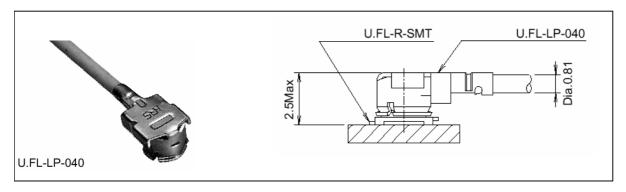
U.FL-R-SMT connector with U.FL-LP-040 plug
